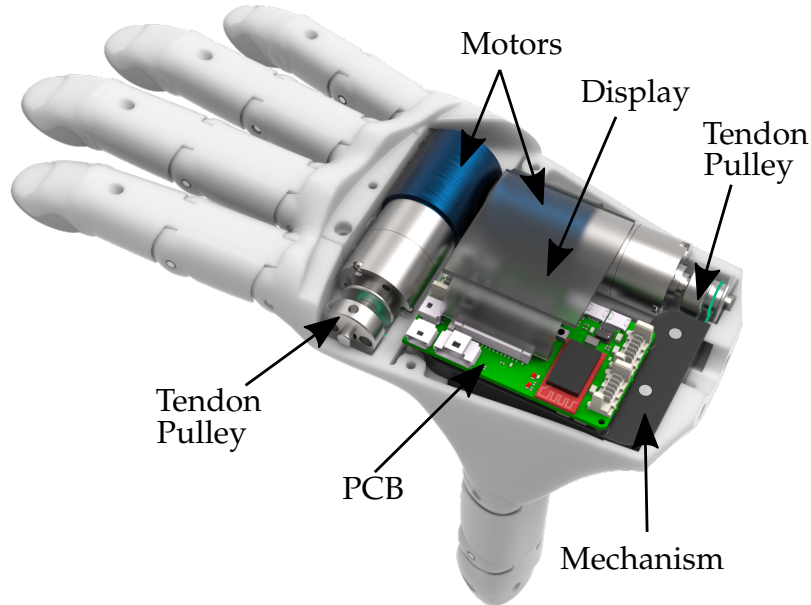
The female prosthesis with motors, mechanism and Printed Circuit Board (PCB) integrated into the palm. Camera and distance sensor are mounted below the mechanism. The mechanism in black is mounted below the PCB. The display is fixed on top of the PCB in the dorsal housing. The display is rendered semi-transparent to make the components underneath visible. Reprinted from (Weiner, Starke, Rader et al., 2022) without changes (CC BY 4.0).
